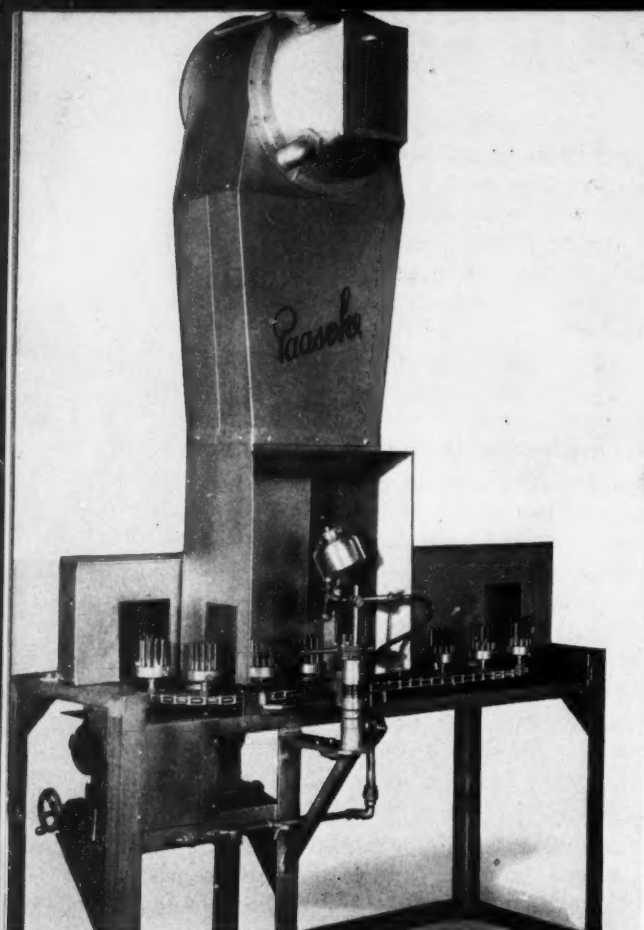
Chain with extended pins is utilized for conveying in this automatic spraying unit. Note small pinion engaging to revolve fixture during spraying
